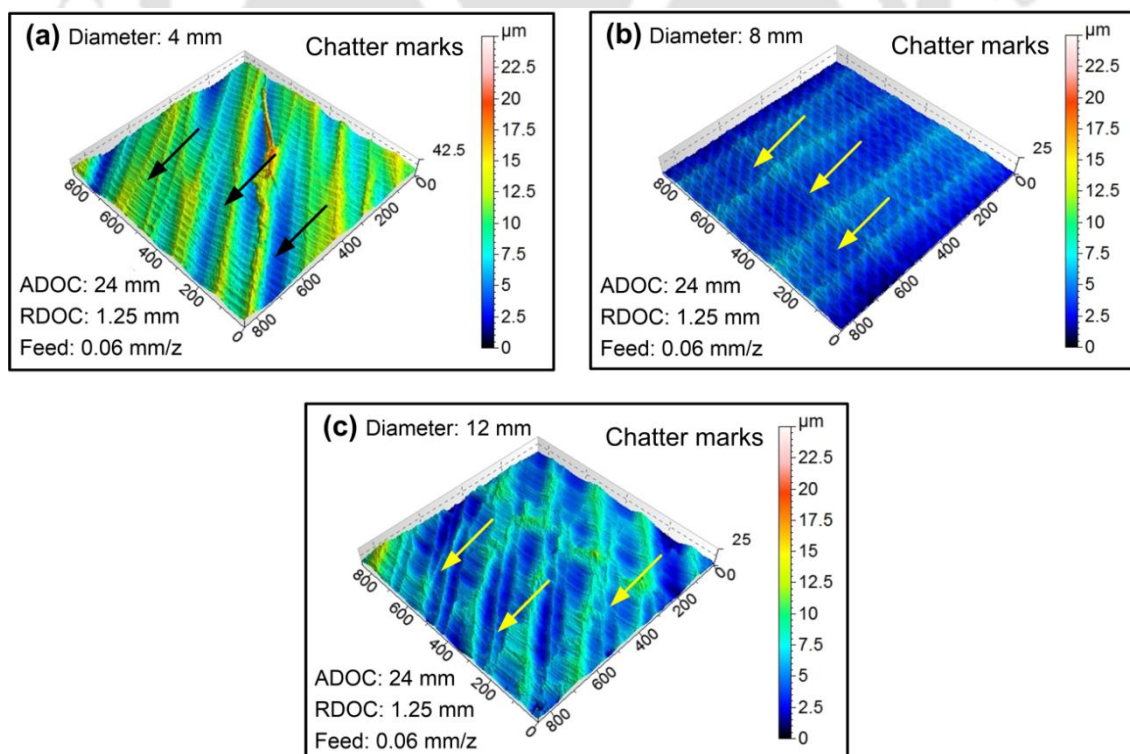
3-D optical profiles of part surface showing chatter mark for: (a) 4 mm diameter tool, (b) 8 mm diameter tool, (c) 12 mm diameter tool
